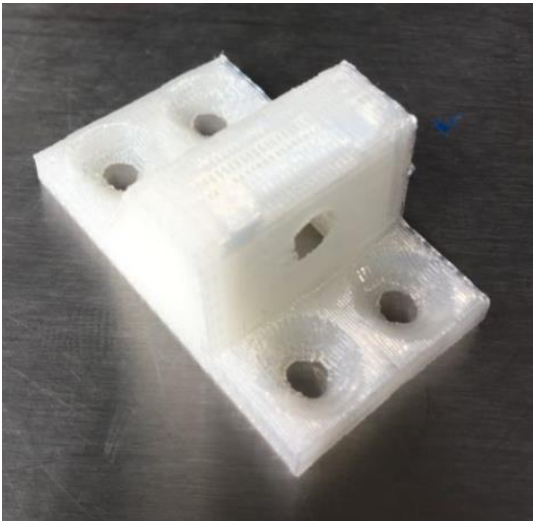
Front view of camera mount. Four holes for placement of wood screws to secure to rocket body and an angled hole for the camera lens.
